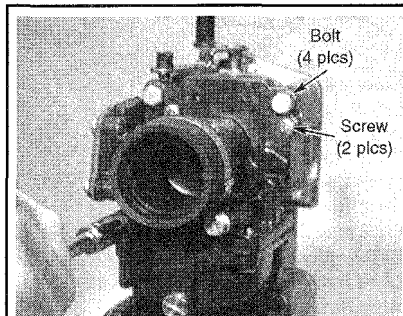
To remove a carburetor from the throttle body, loosen the bolts and Phillips screws
